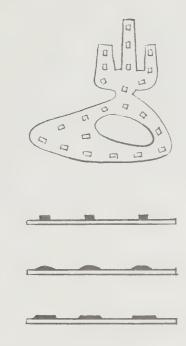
solder before heating solder slightly flowed solder flattended by filing
